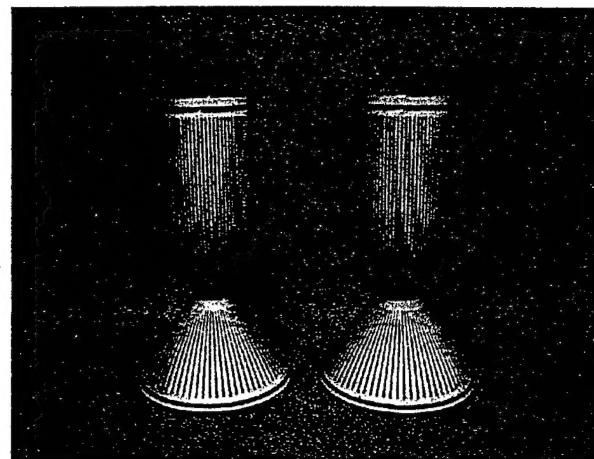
Cu-8Cr-4Nb Powder Metal Alloy Chamber Liners, Machined and Gold Plated
